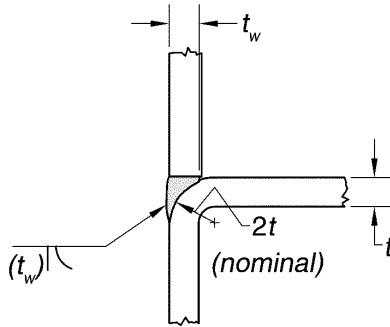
Flare bevel weld, equal width HSS weld joint.
